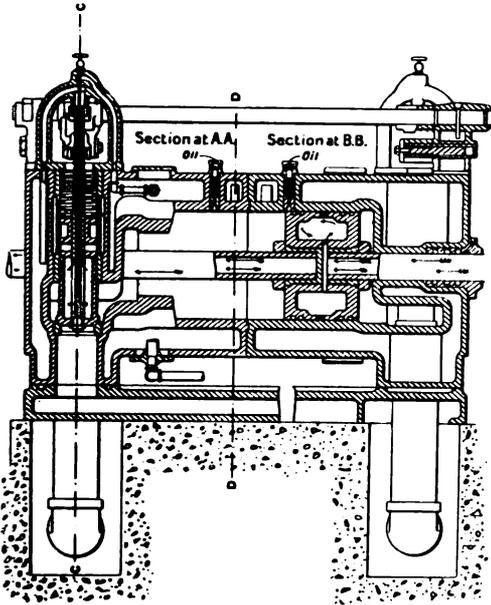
Longitudinal section of Riverside Engine Co.'s Tandem Engine.
